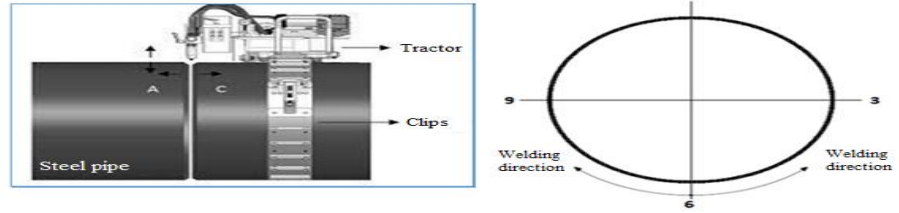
Figure A. Overview of orbital welding system basic working principle and welding direction
